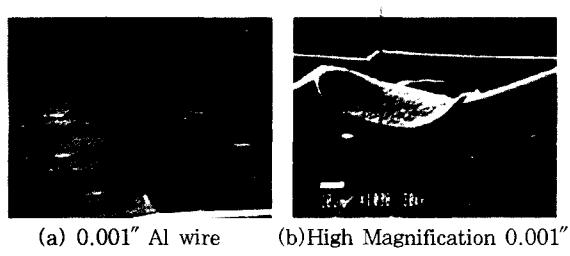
Example of ultrasonic welding with 0.001"Al wire to IC chip
